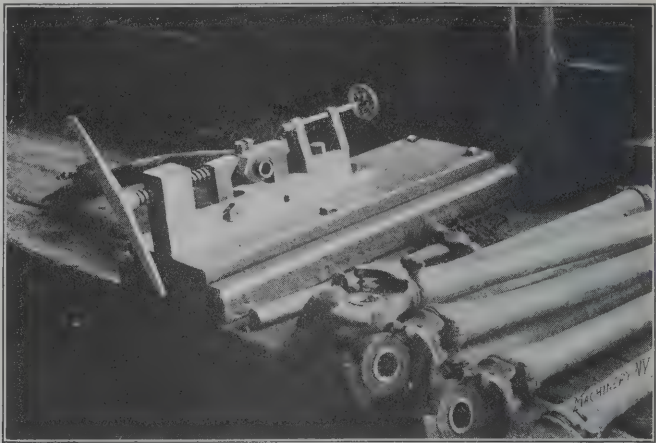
Tool for Compressing Air Hose Clamp Collars
